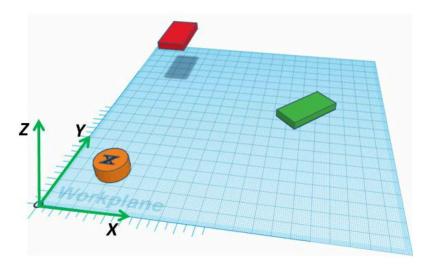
SYSTEM LAYOUT: MOUNTING BASE AND WORK PIECES
